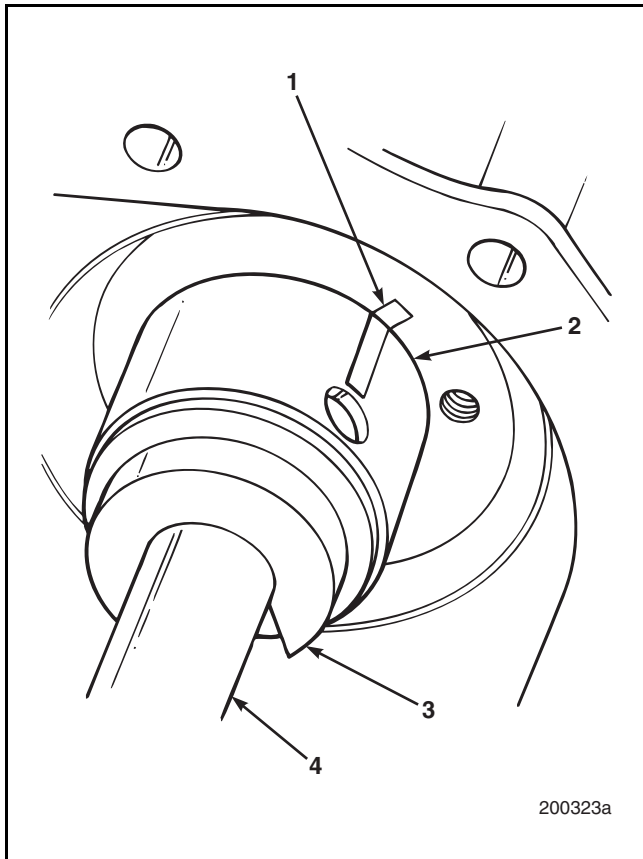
Auxiliary Driveshaft Bushing Alignment
